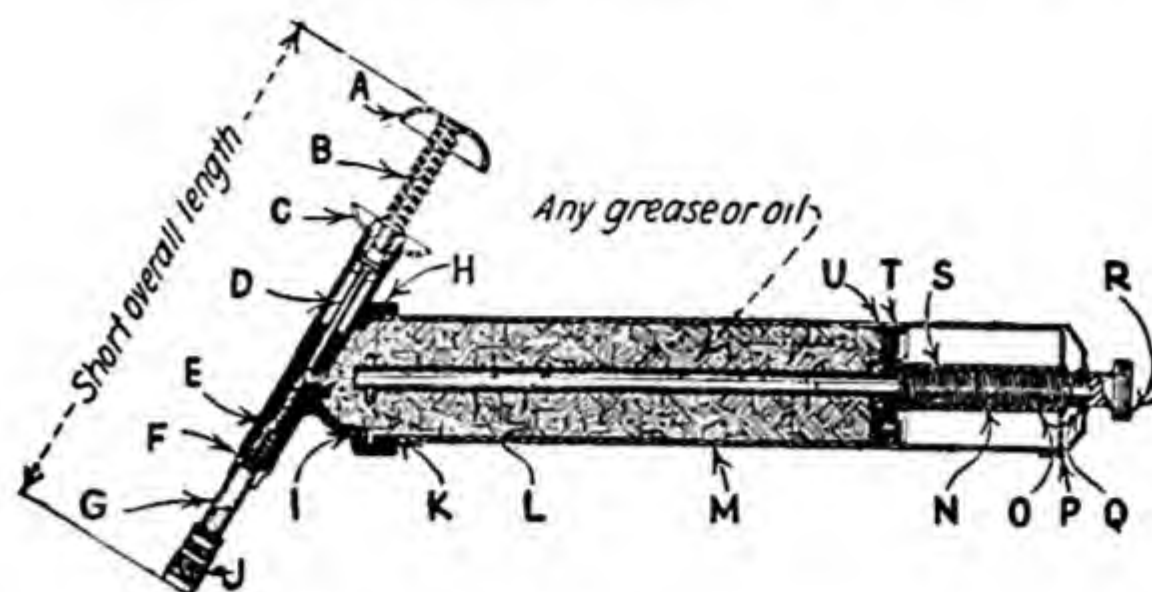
Hydraulic grease gun and fittings, showing cross section of nozzle and fitting.
